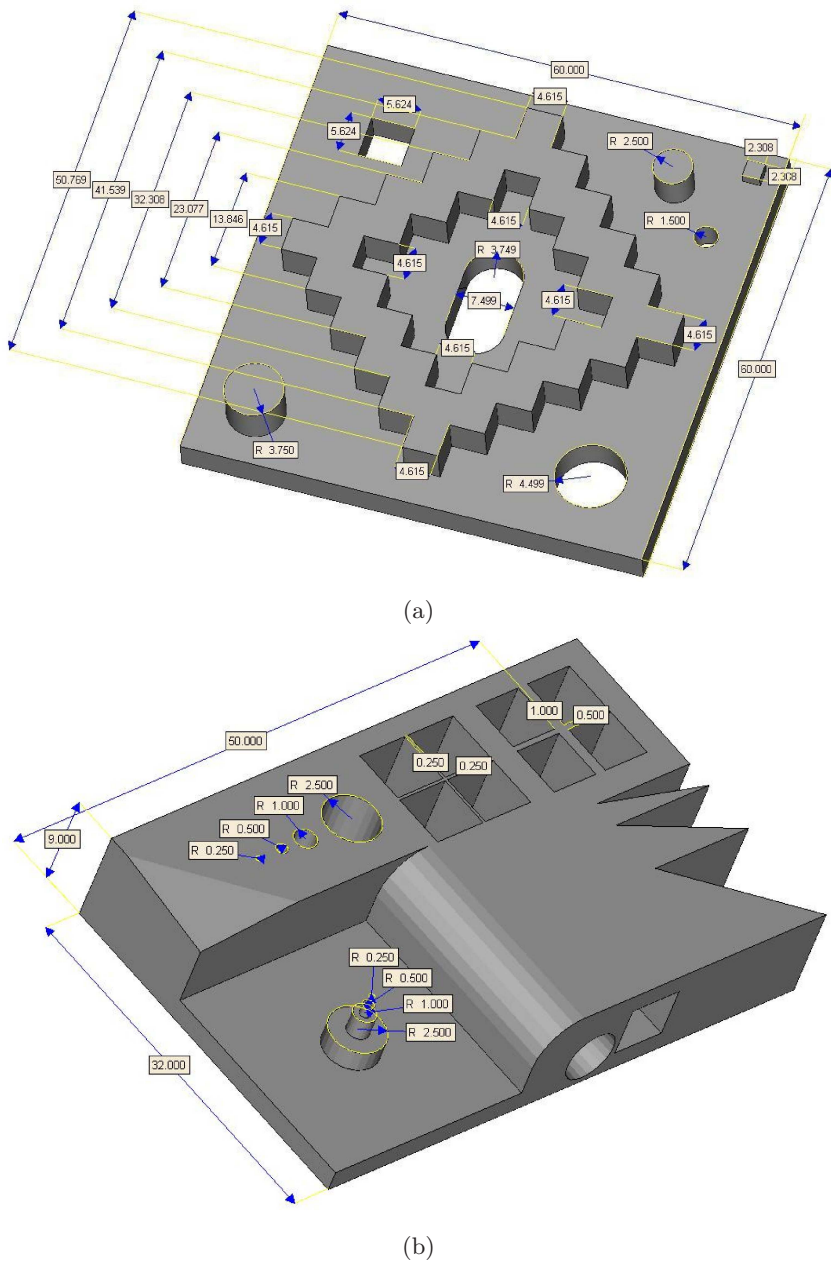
CAD dimensions of the benchmark parts depicted in figures 4.5c (a) and 4.5d (b).
